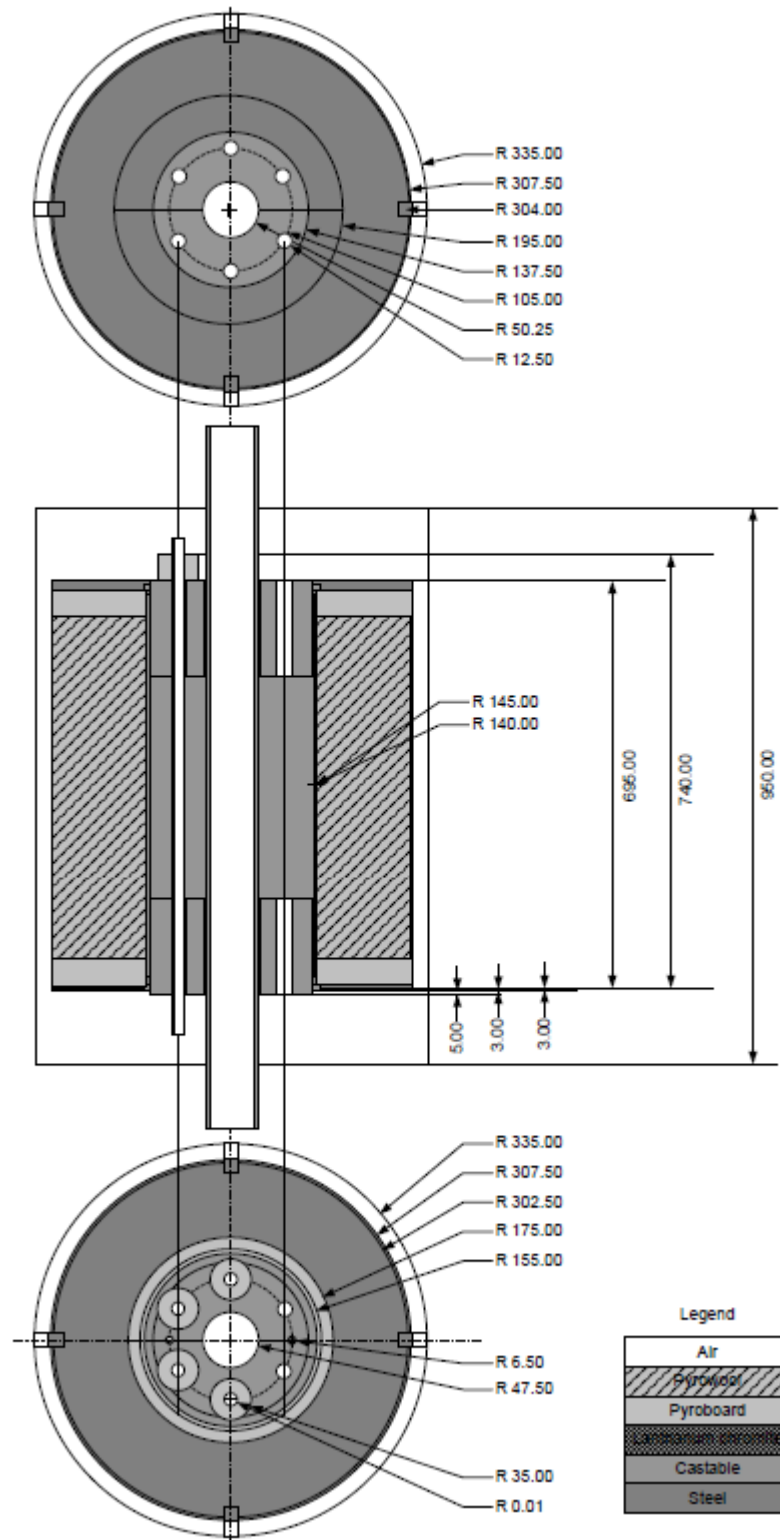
Principle drawing of Carbolite PVT 18/80 vertical tube furnace. From Steenkamp⁵⁸
